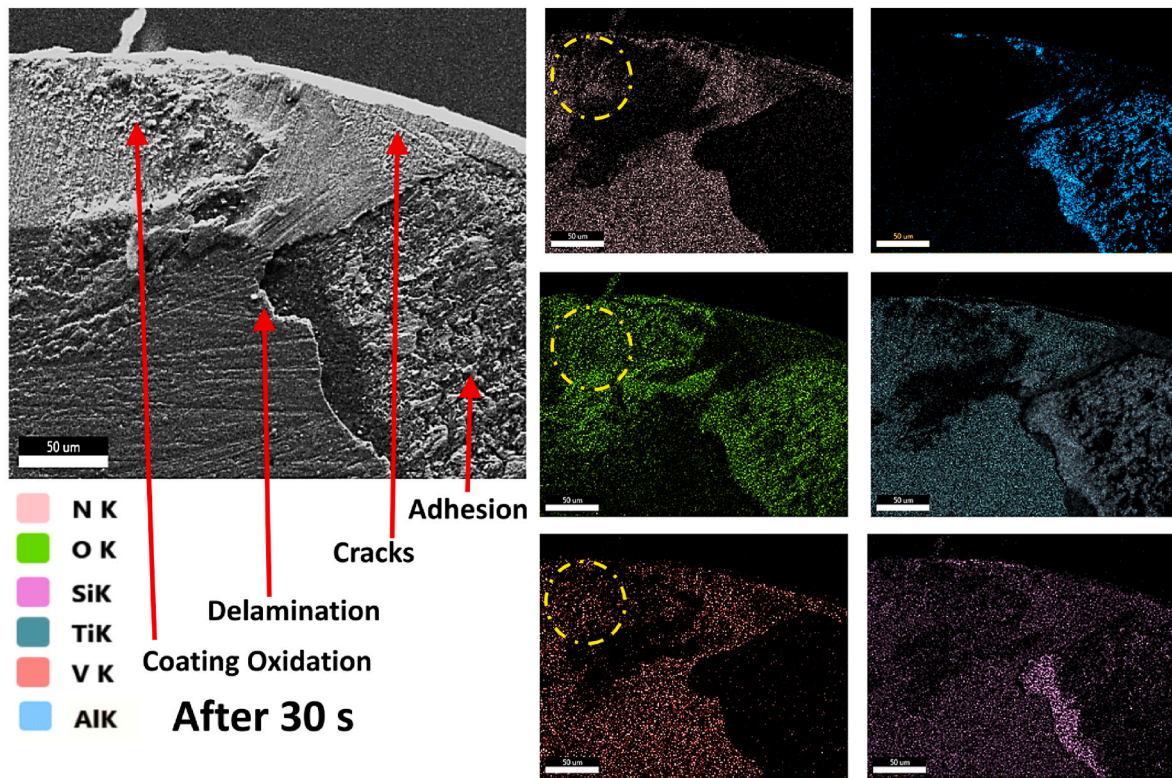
SEM micrographs showing wear on the rake surface of TiSiVN coated tool after 30 s of machining.
